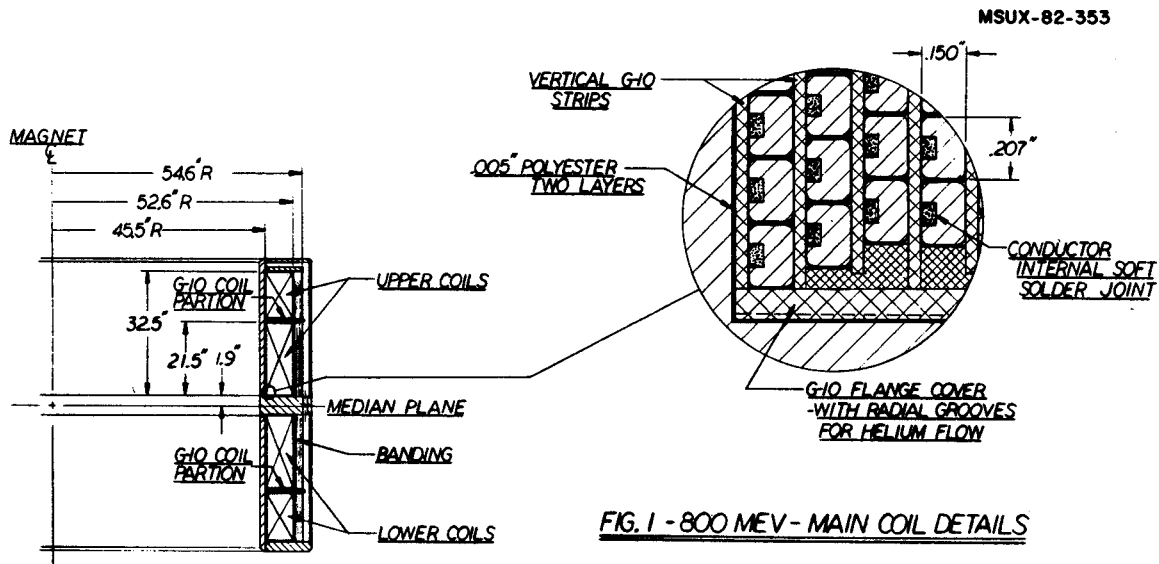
800 MEV - MAIN COIL DETAILS
